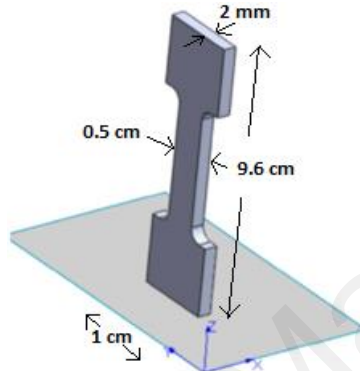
systematic drawing of the sample illustrating its dimensions
